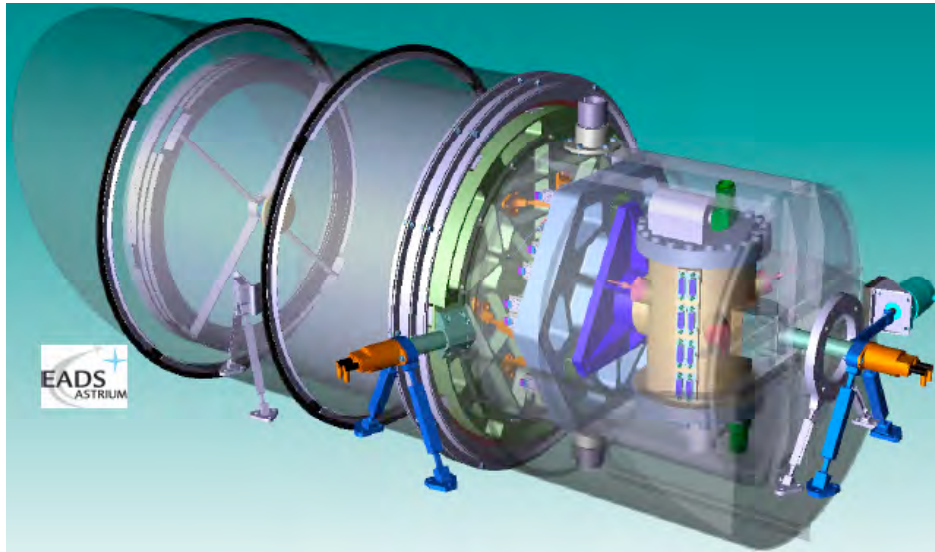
Optical assembly, containing (from left to right) the telescope assembly, the optical bench, and the proof mass vacuum enclosure.
